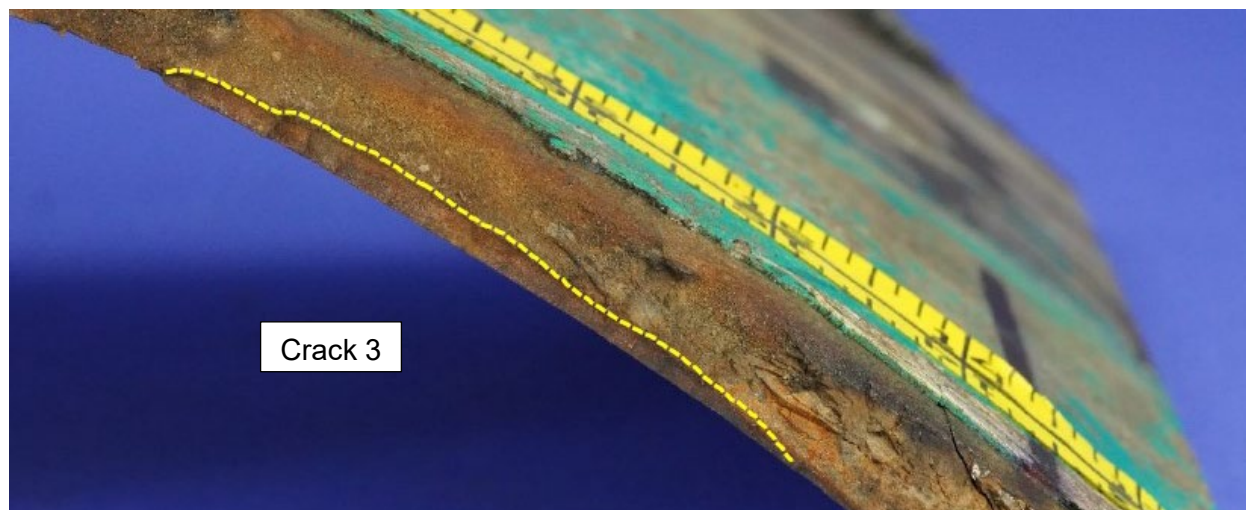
Magnified View of Crack 3 in GWD 13530 (G59B)
